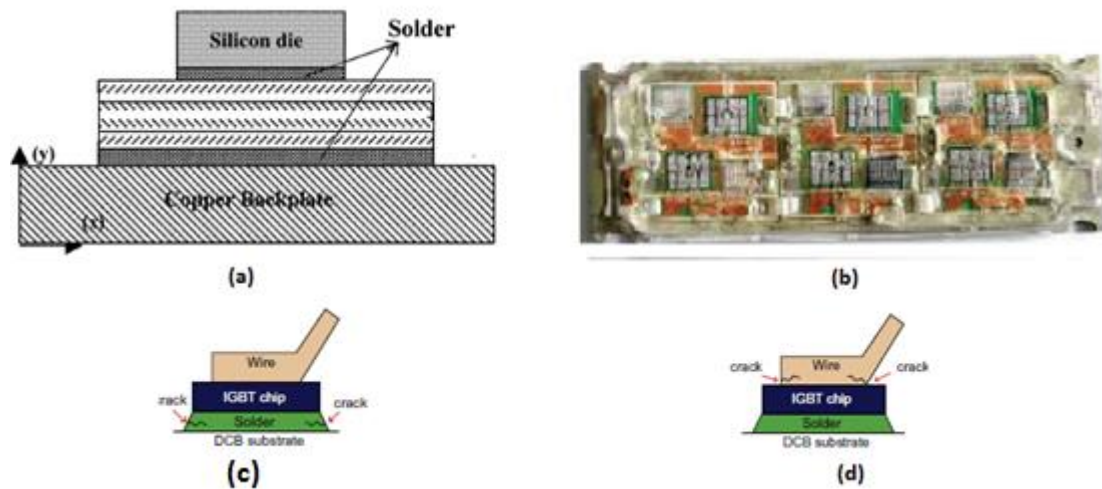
(a) Schematic cross section of conventional multilayer structure; (b) IGBT module; (c) Solder fatigue; (d) Bonding wire failure.
